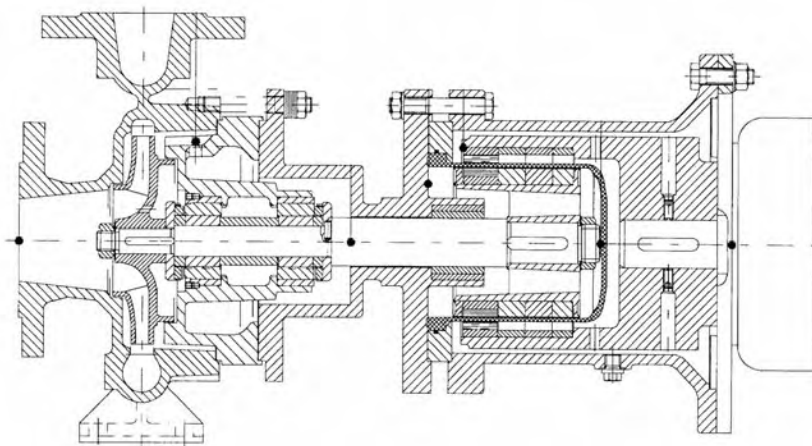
Heat transfer oil pump with a heat barrier and magnetic coupling in a compact monoblock construction
